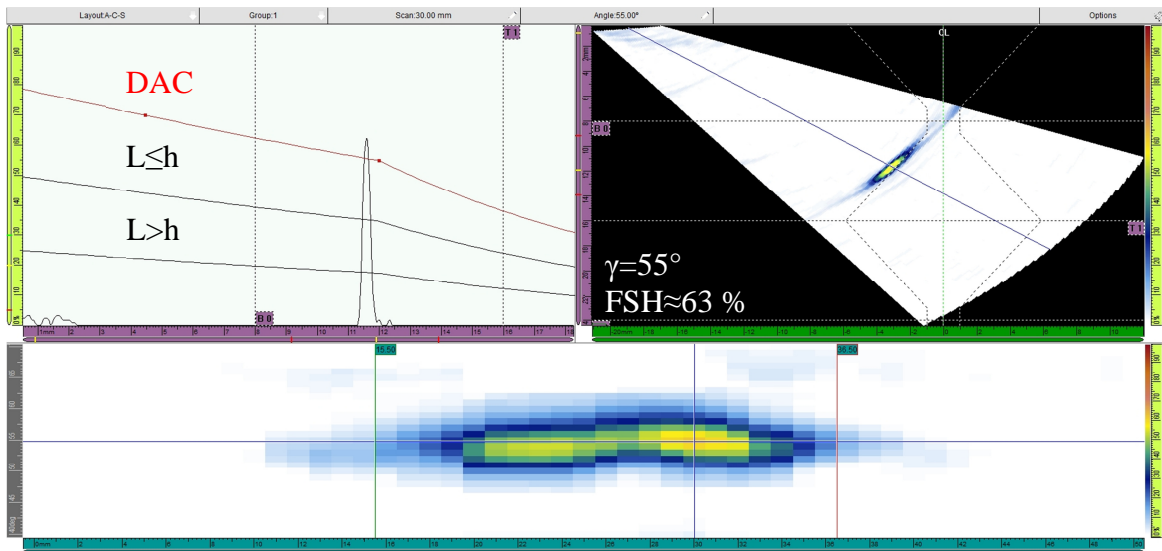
The lack of side-wall fusion on the left side of welded joint, DAC Ø3 mm (A)
